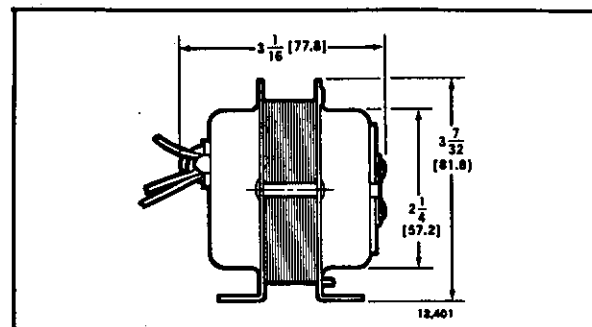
AT72D DIMENSIONS IN in. [mm IN BRACKETS]; FOOT MOUNTING.
